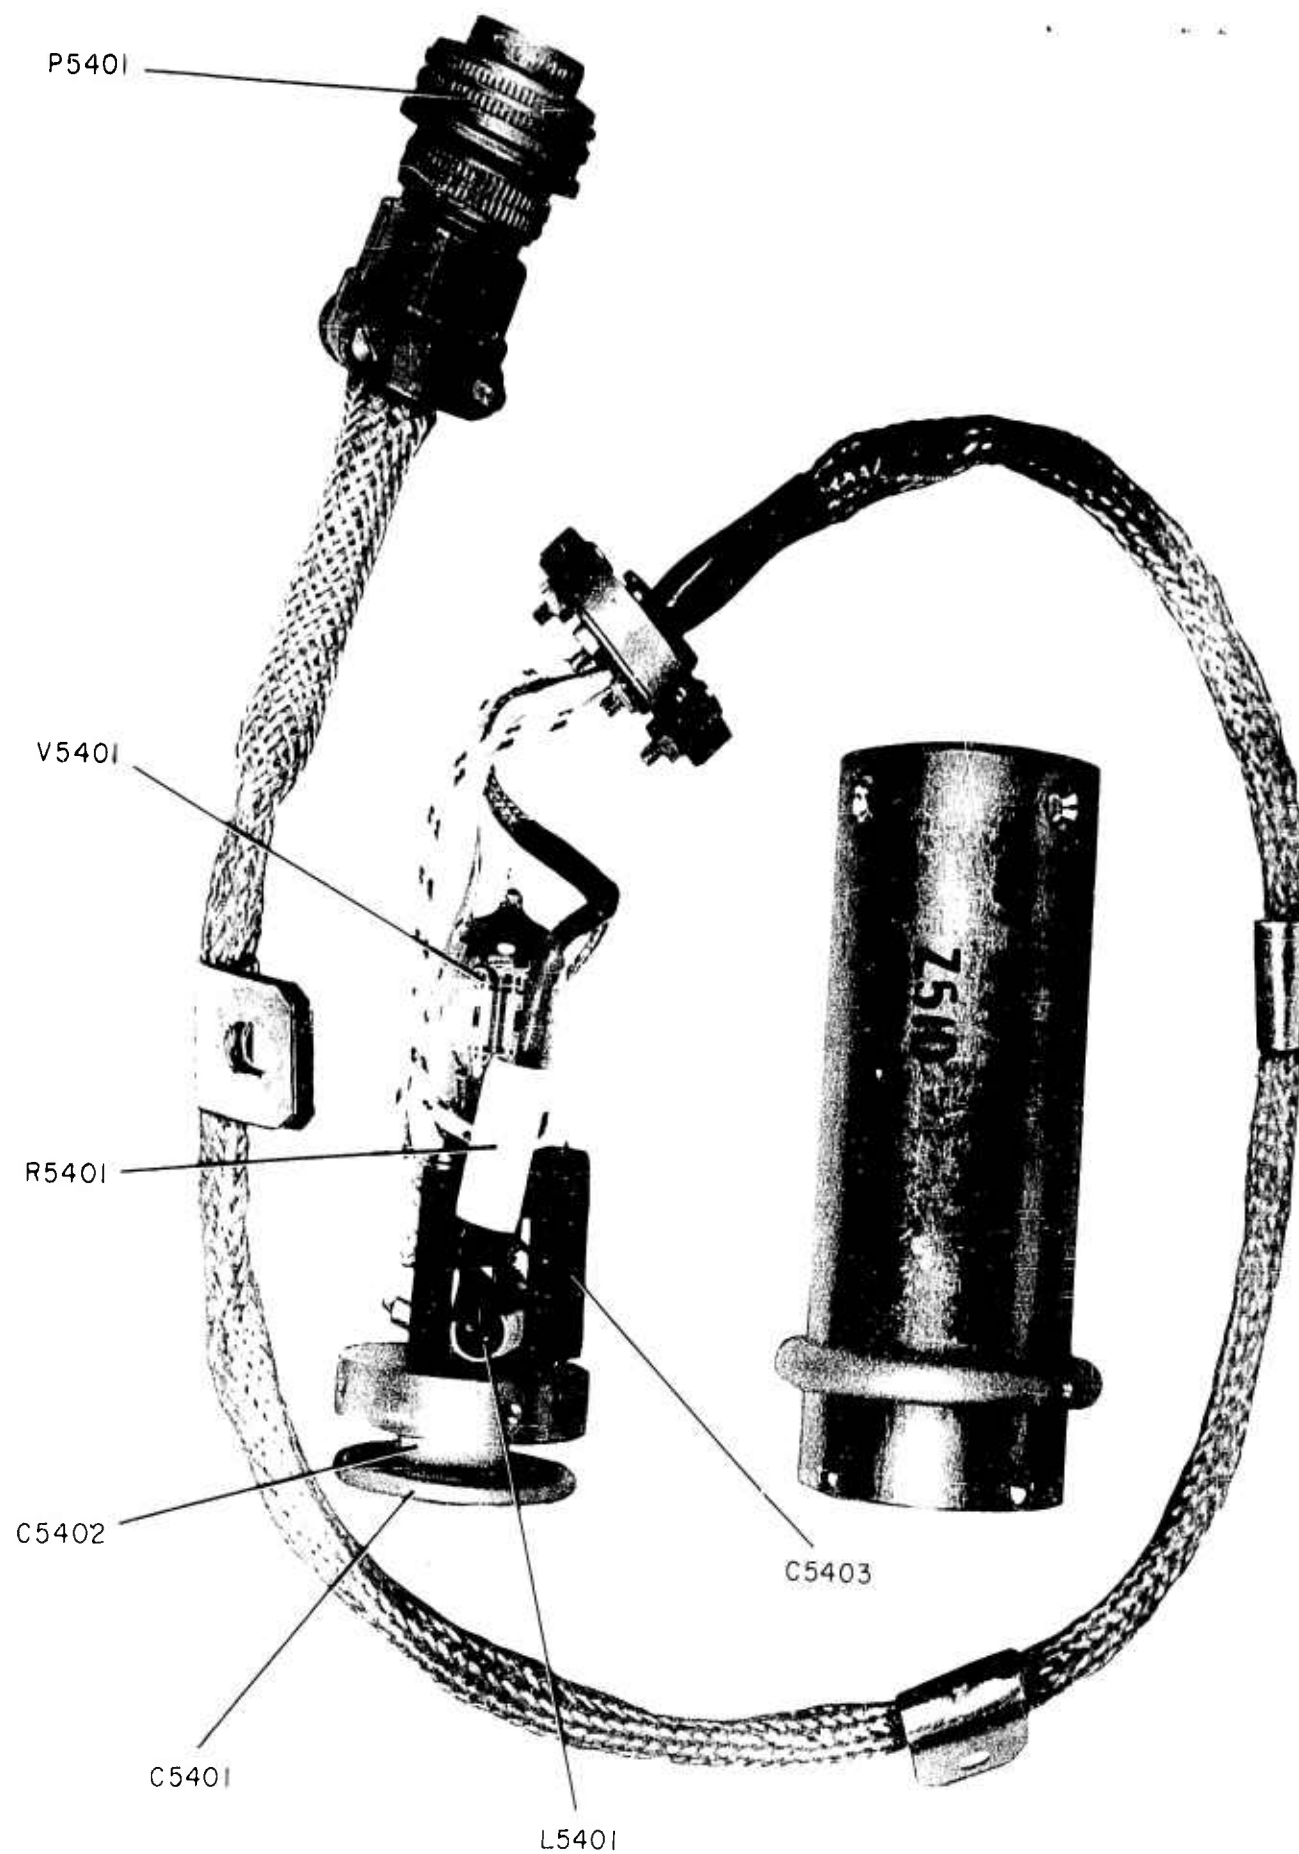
Plate Feedback Probe Z510, Shell Removed.
